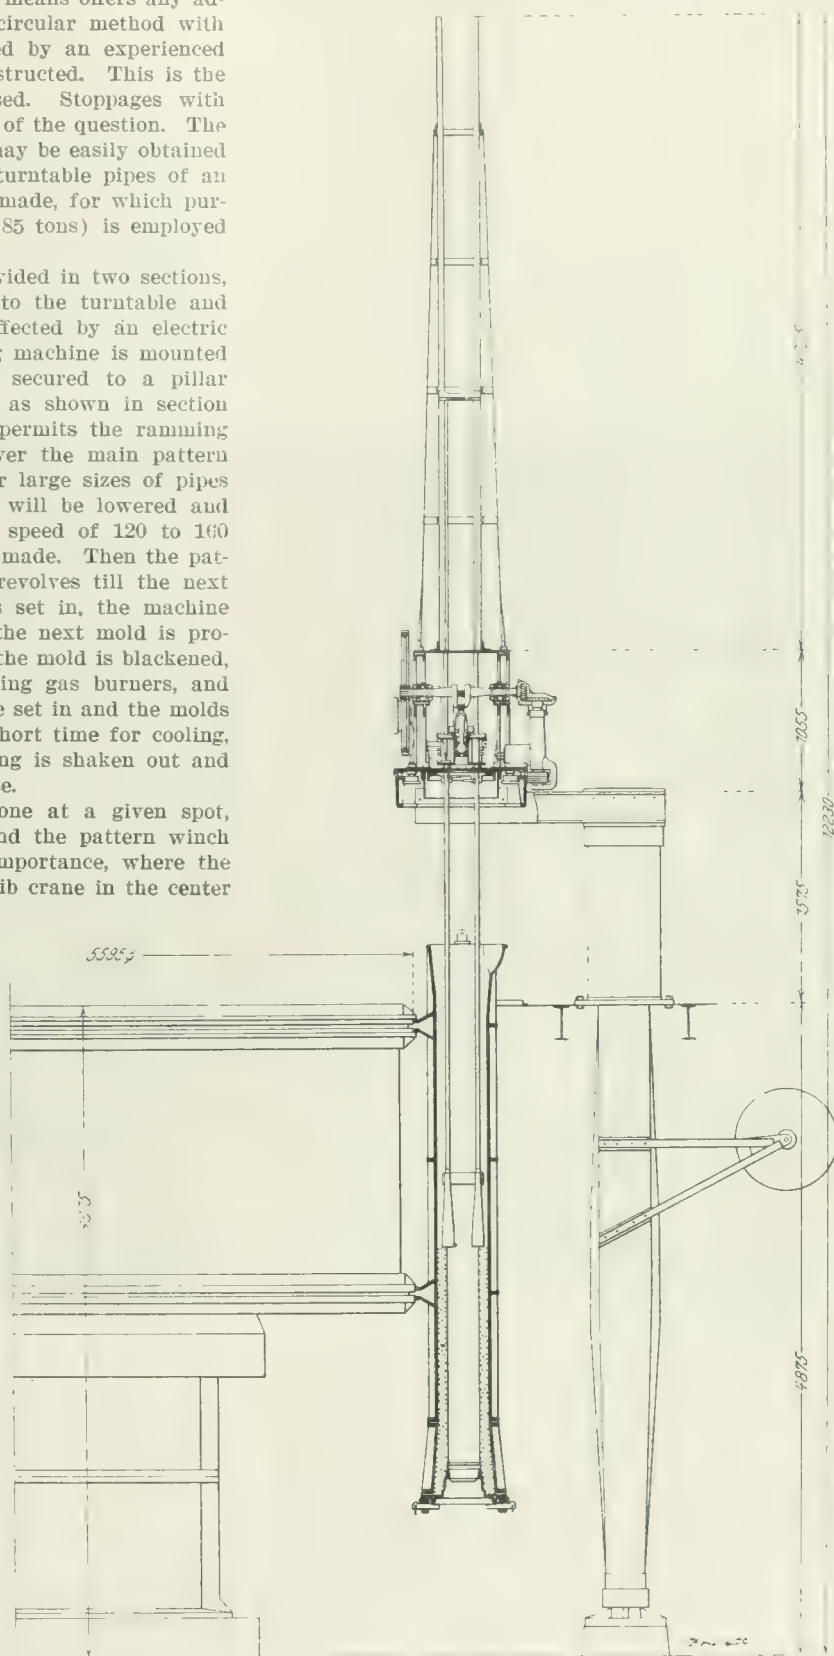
Sectional View of the Ardelet Ramming Machine.— Dimensions in Millimeters.
